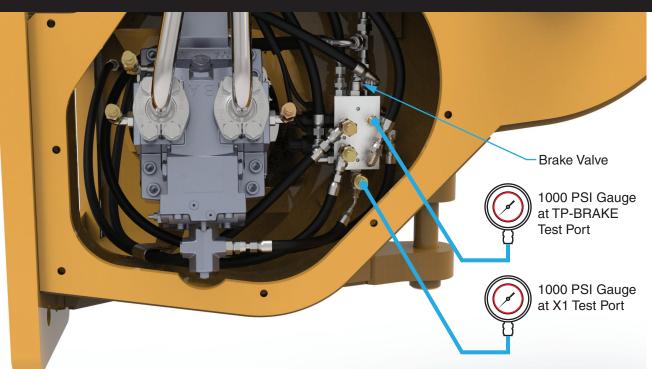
Brake Valve Pressure Check and Adjustment (K49 shown)
